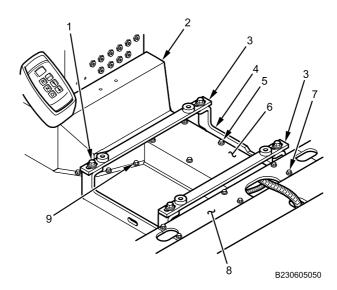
PDM Harness Electrical Storage Shield and Duct Covers.
